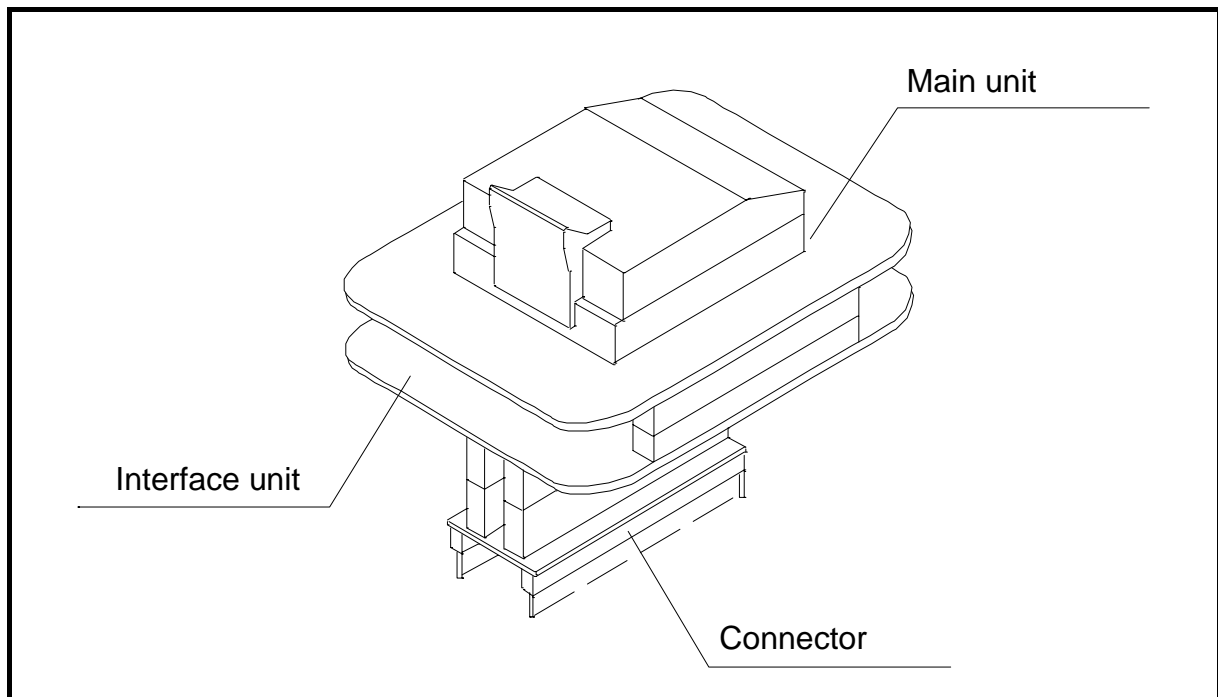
External view of the programming adapter (QFP, SOP, LCC type IC socket) and constituent parts
